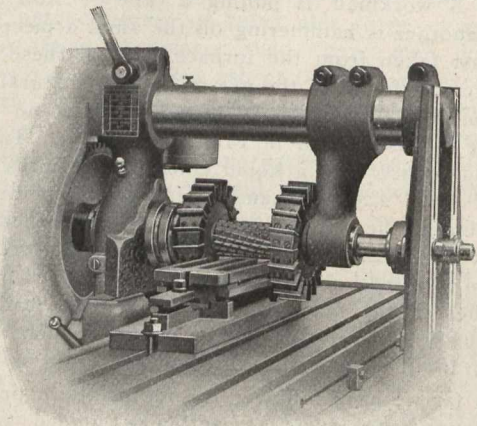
Rough Milling the bottom and sides of a Vise Bed.
